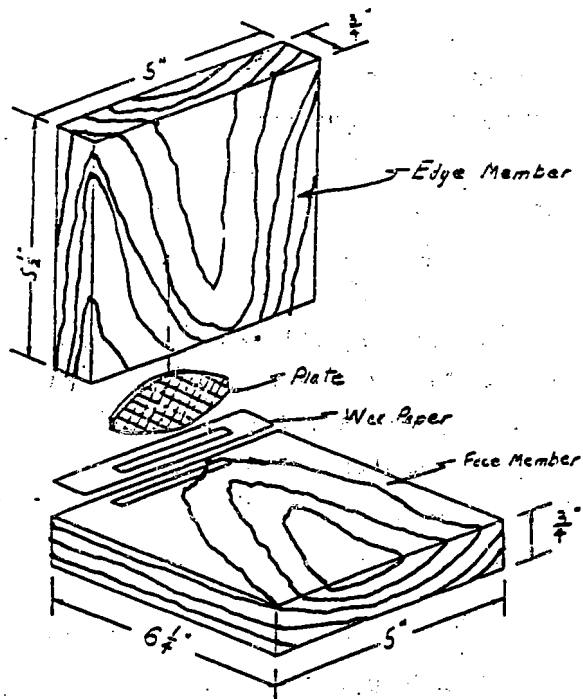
Exploded view of the end-grain corner plate-joint specimen. Dowel-joints were made in the same fashion, with a single birch dowel substituted for the plate.
